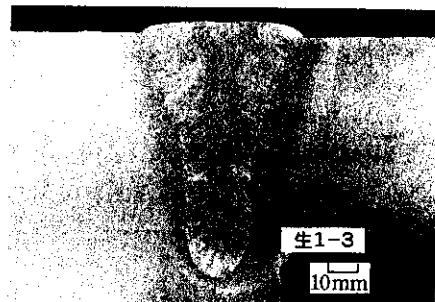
Cross sectional macrostructure of the 3-electrodes, 1 pass submerged arc welding for heavy section plate of 80 mm in thickness
